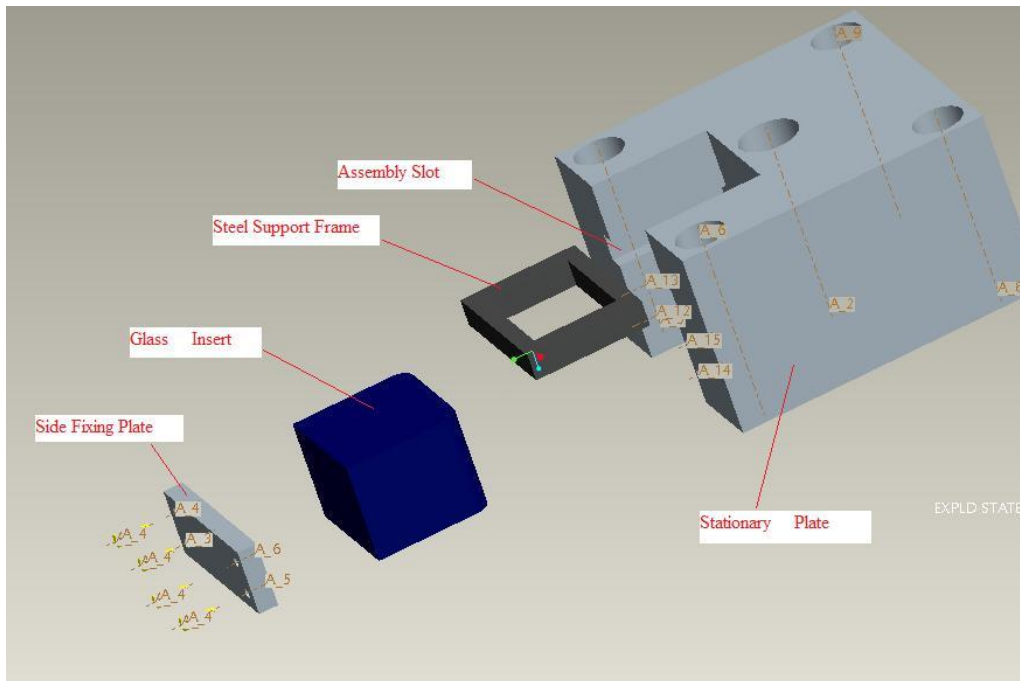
3D Explosion Drawing for moving side of the glass inert mold
